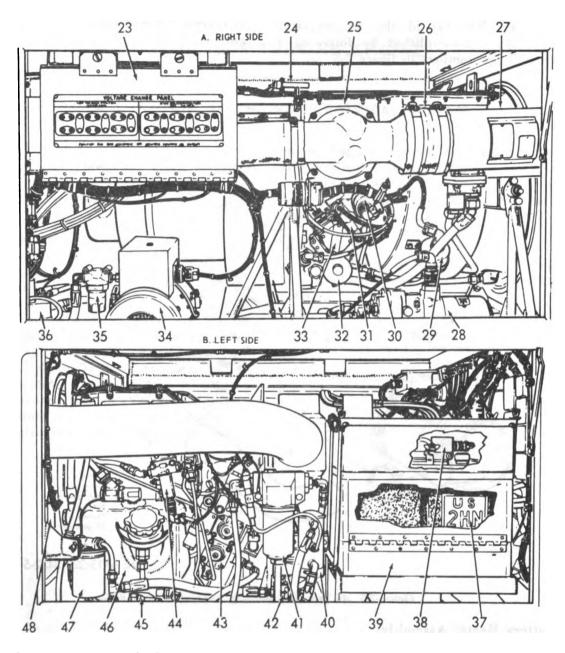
Engine and ac generator assembly removal and installation. (sheet 1 of 2).
